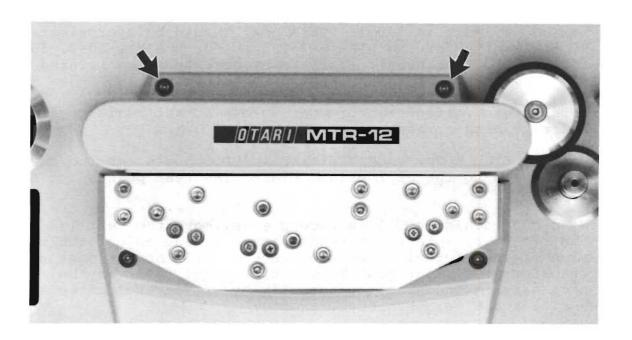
REMOVAL OF THE HEAD ASSEMBLY REAR COVER
